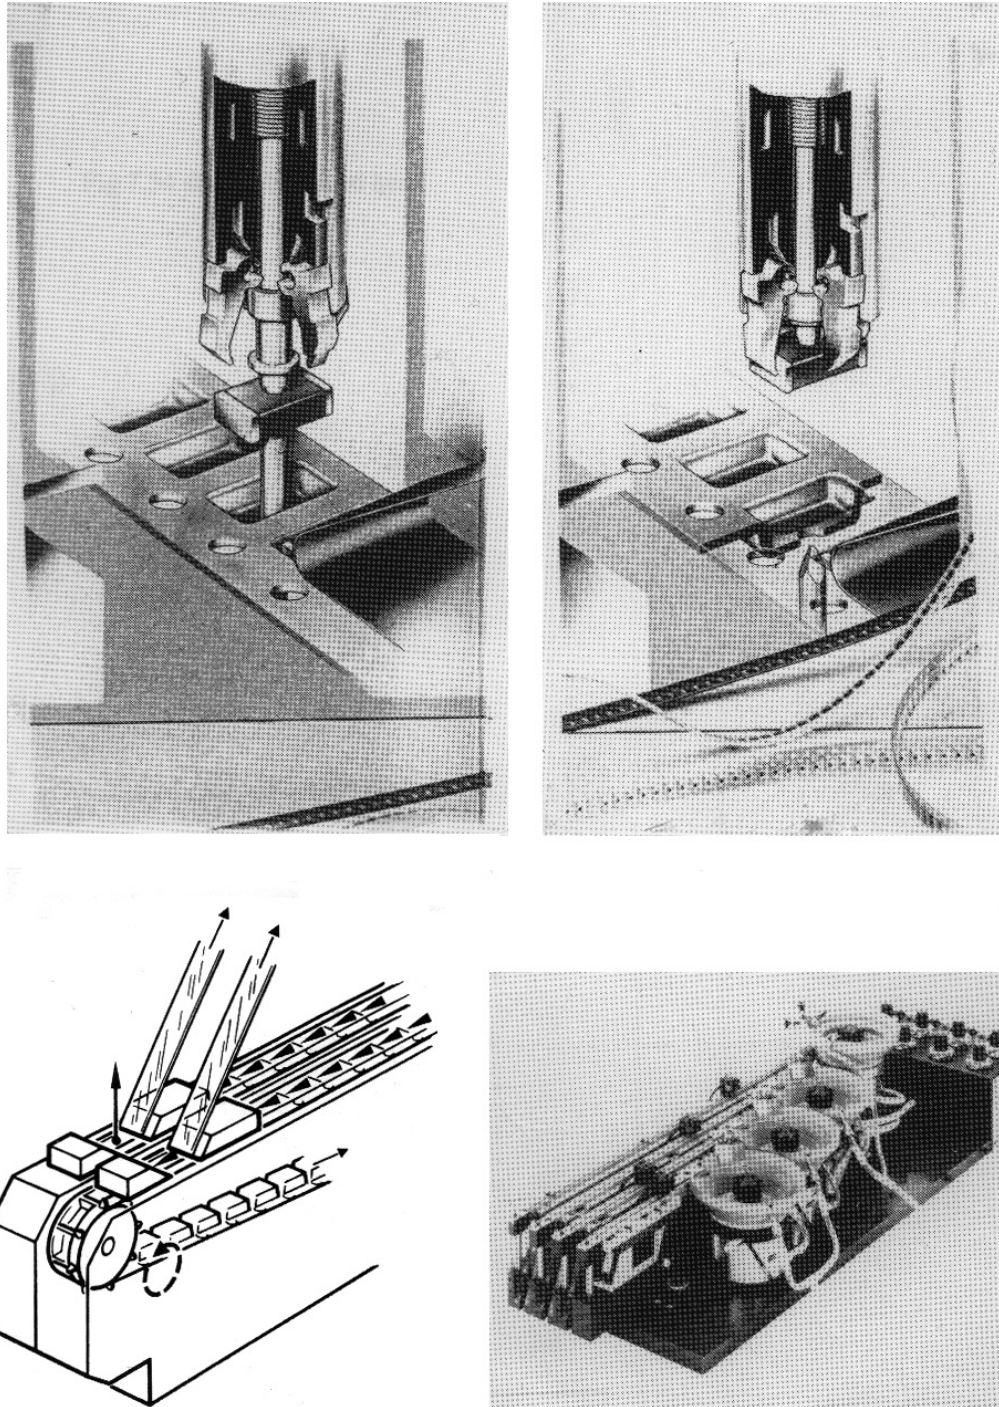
a): Mechanical gripper in pick-and-place machine. b): Detail of the component tape when a component is in position for picking. c): Vibration feeder.
